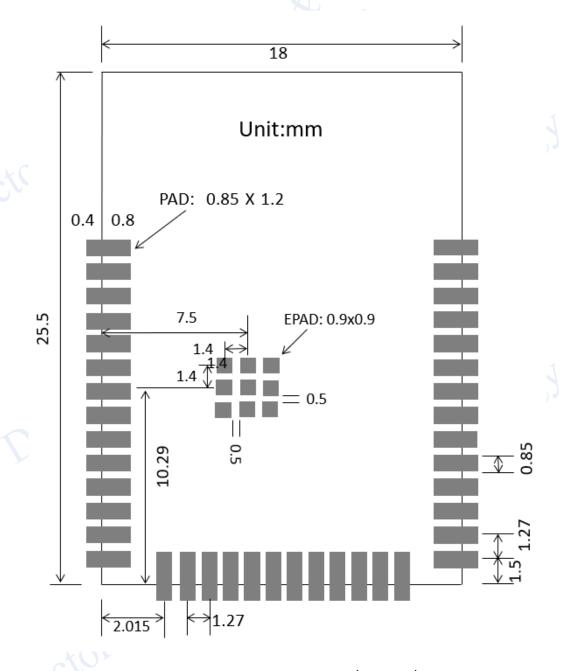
PCB Layout for ESPS3-32 (Top view)
